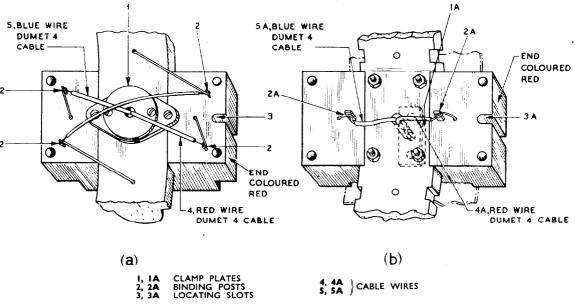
Terminal plate connections: (a) Type 3; (b) Type 4
